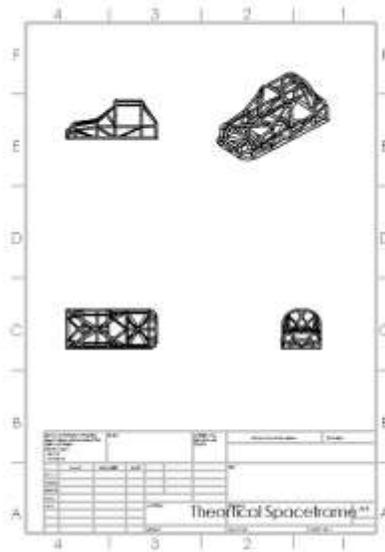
Simple Spaceframe Chassis Drawings
